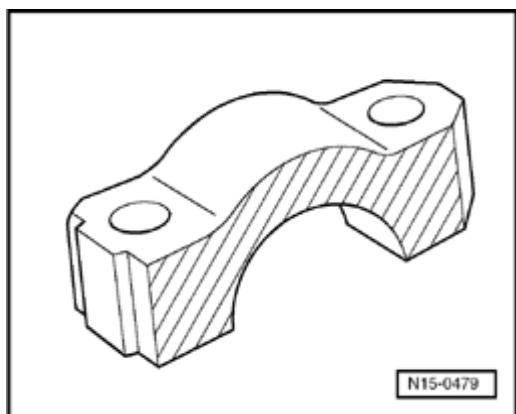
Greasing contact surfaces of bearing caps 7 and 8 lightly before installing
